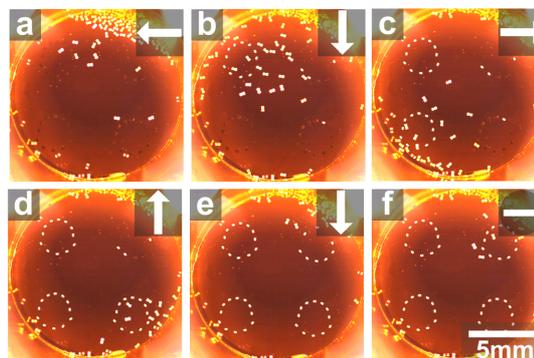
Delivery of SMT components into the template 1 apertures of circular test circuits with 48 components using feedback driven assembly [3]; arrows in each frame indicate the direction in which the SMT components are driven: a. assembly begins with parts being driven to the left from the top right corner; b. after the components for the top left ring have been delivered, the parts are driven downwards to the bottom left; c. rightwards; d. upwards; e. now that most of the excess parts are located above the top right ring, we drive the parts downwards, as some sites in the top right ring remained vacant after step d; f. delivery completed. 100% excess parts has been used in this assembly (96 components used); this design demonstrates our ability to place components at arbitrary in-plane orientations, and is not a demonstration of packing density.
